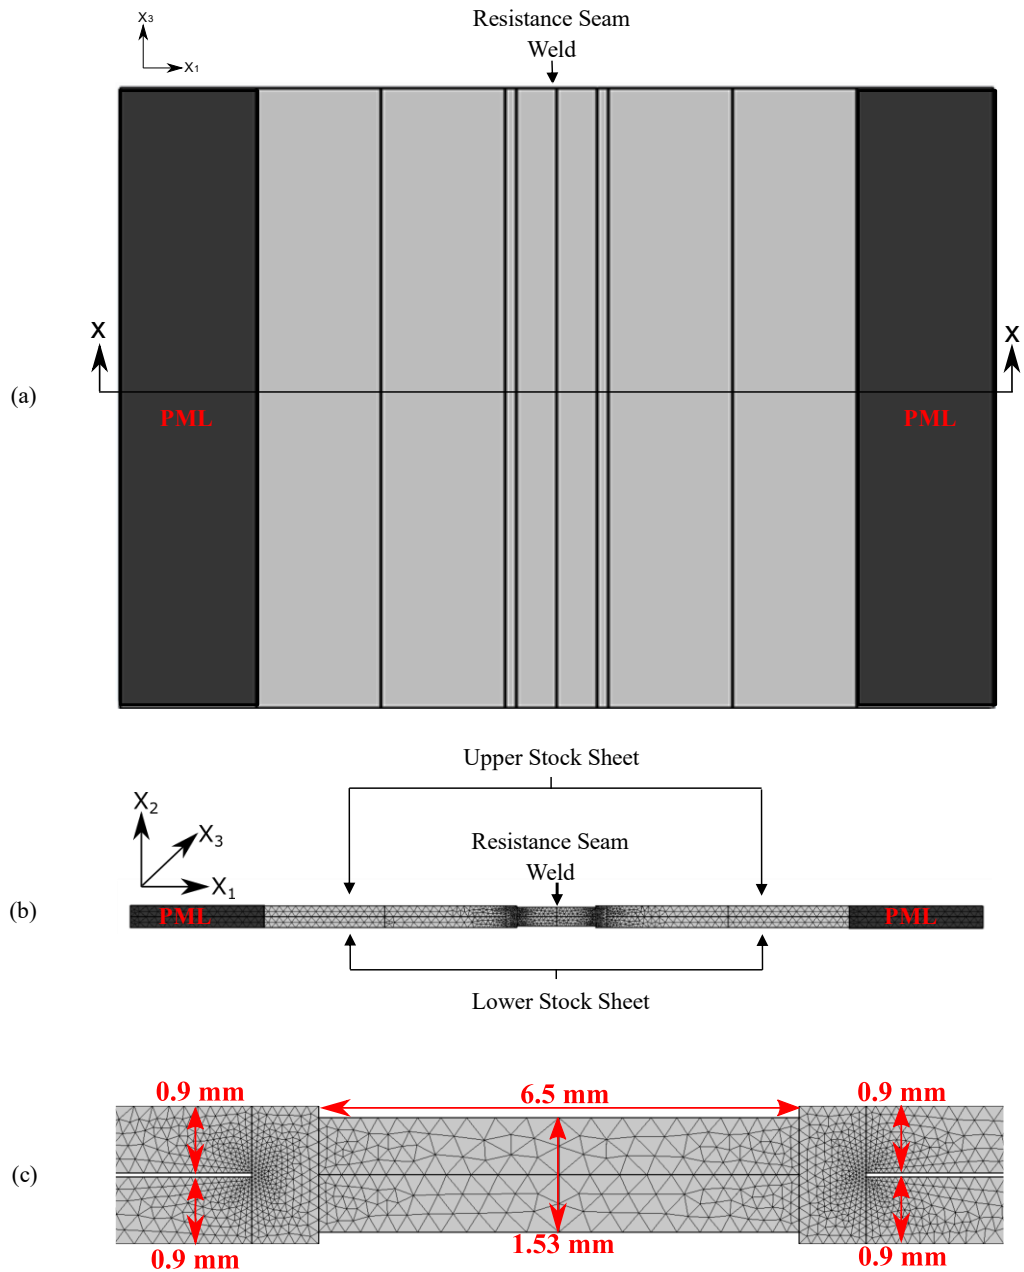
Schematic of SAFE model geometry (a) Plan view of RSW component with cross-sectional arrows. (b) 2-Dimensional cross-sectional view of the discretised SAFE model geometry detailing the RSW and stock sheets. Stock sheets either side of the weld are separated by a 0.05 mm air gap. (c) Detailed view of the 2-Dimensional cross-sectional discretised SAFE model geometry detailing relevant dimensions taken from the CT scan.
